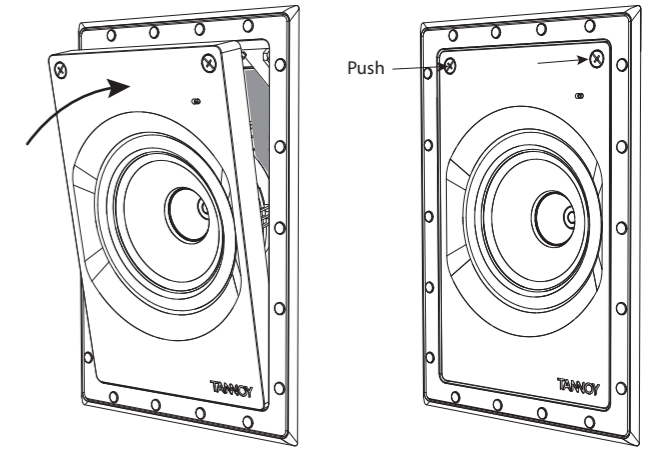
Installing the Loudspeaker Assembly into the Frame
